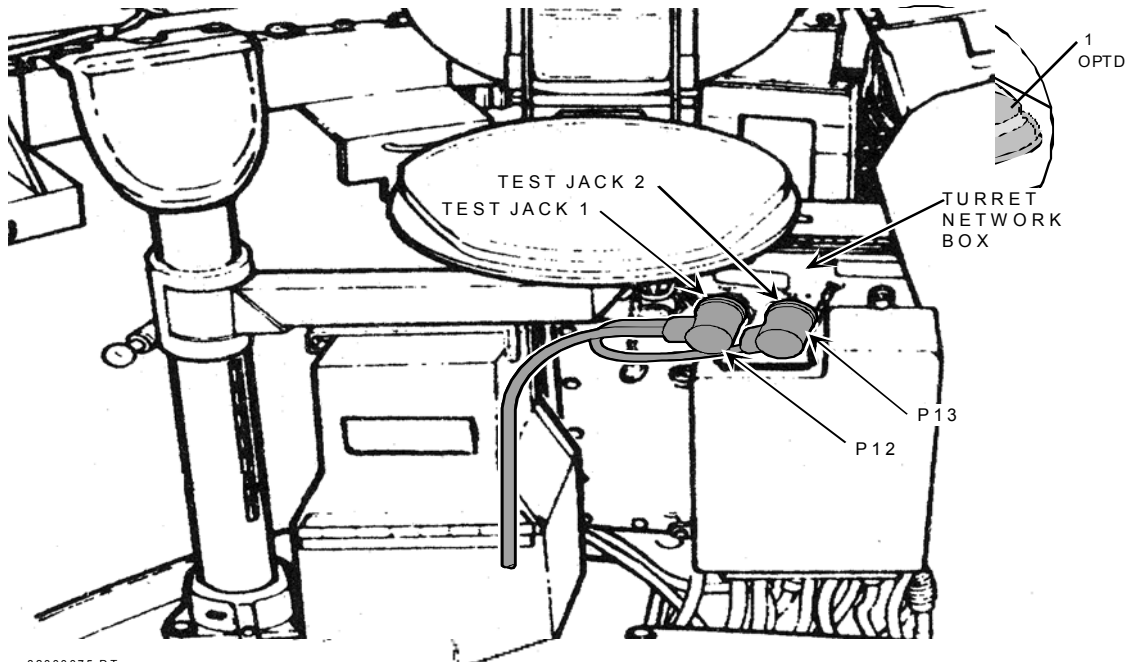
M1A1 System Cable connection to Turret Network Box (TNB).
